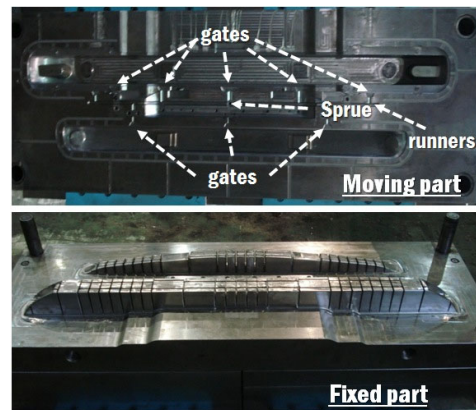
Injection mould for the bumper back-beam consisting of TPO
